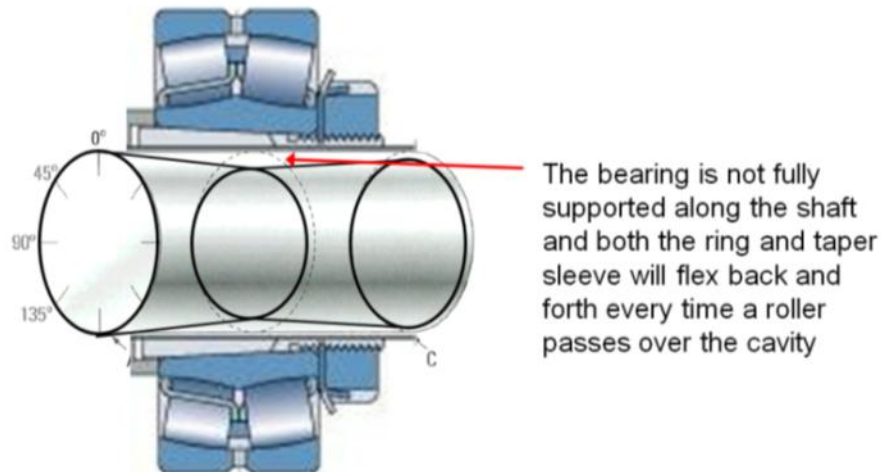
Roller Bearing Reliability is Compromised by the Shaft Condition
